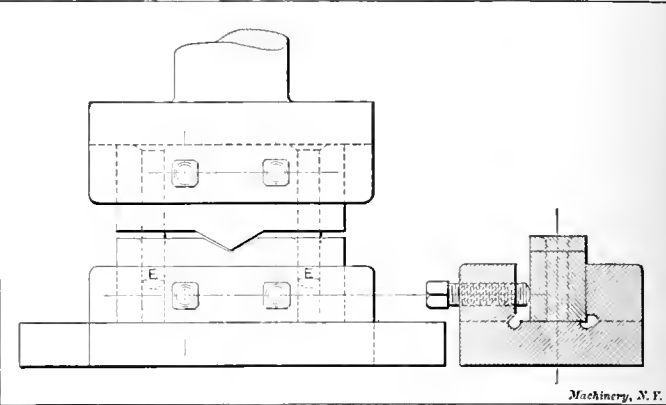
Simple Form of Die Holder adapted to Bending Die
